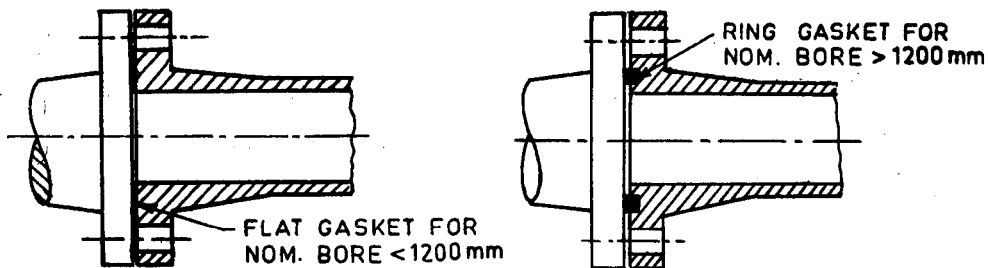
ILLUSTRATION OF FLANGED JOINT
